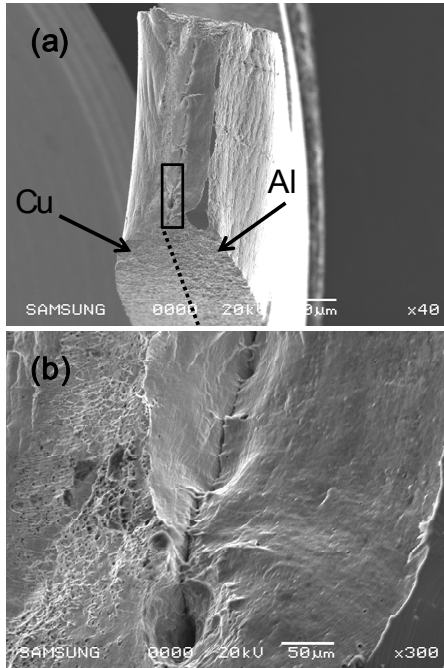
SEM fractograph of Al/Cu clad taken after tensile test (a) and enlarged image denoted by the box (b)
